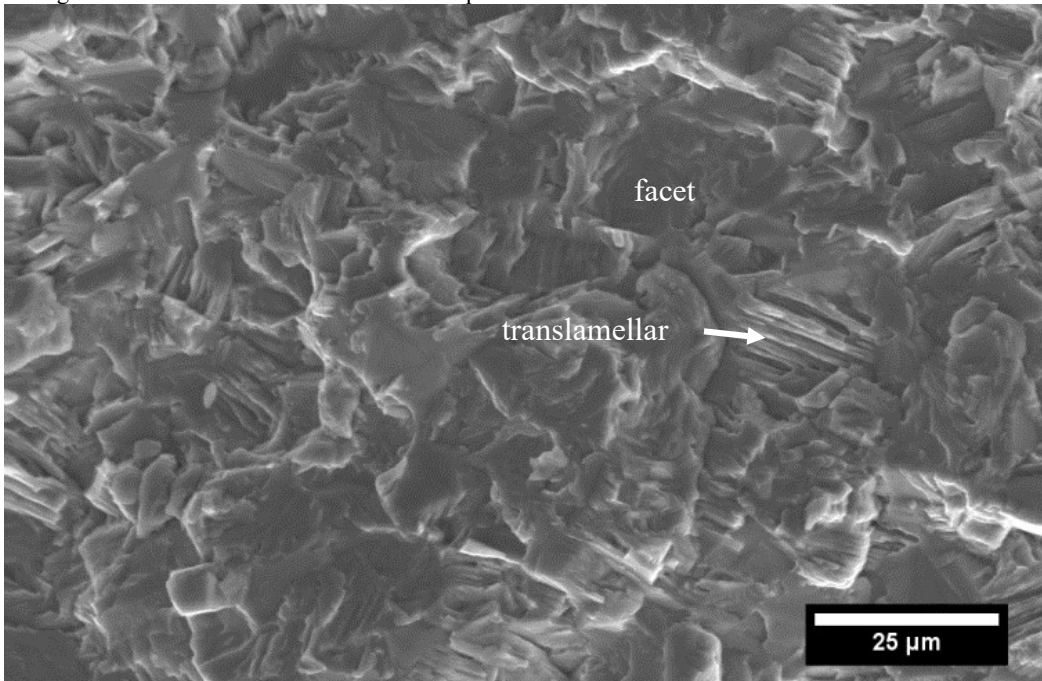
Representative fatigue crack SEM-SE fractography of sidepress-forged fatigue fracture features in the low  $\Delta K$  regime at  $R = 0.1$ . Crack direction is from top to bottom.
